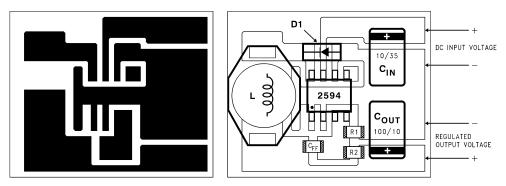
TYPICAL SURFACE MOUNT PC BOARD LAYOUT, ADJUSTABLE OUTPUT (2X SIZE)
